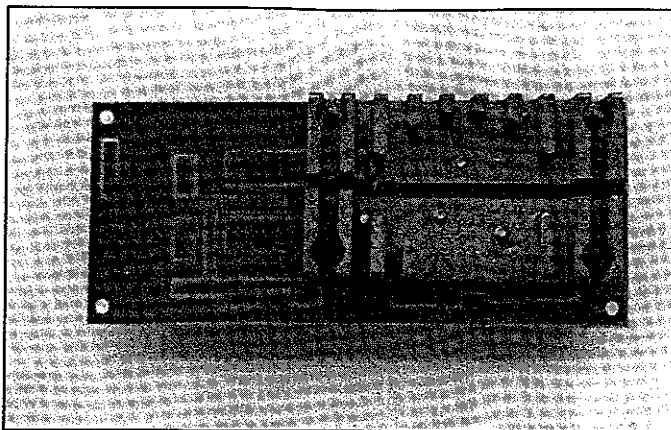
Photograph of the top side of the amplifier PC board showing the heat sinks. A single heavy-duty, extruded heat sink has been cut in half to provide individual sinks for Q1 and Q2 of fig 1. The heat sinks and their mounting screws must be isolated from circuit ground (see text).
